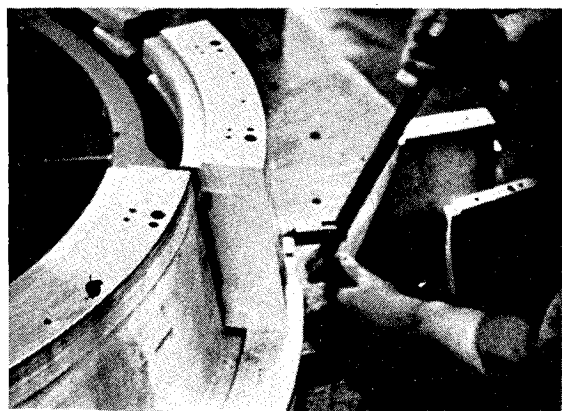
Wax pattern tooling; pull back of outside o.d. ring die blocks.
